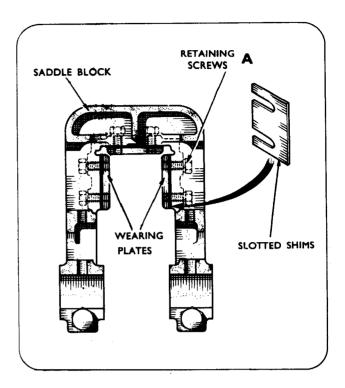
Adjusting the Saddle Block Wearing Plates.
